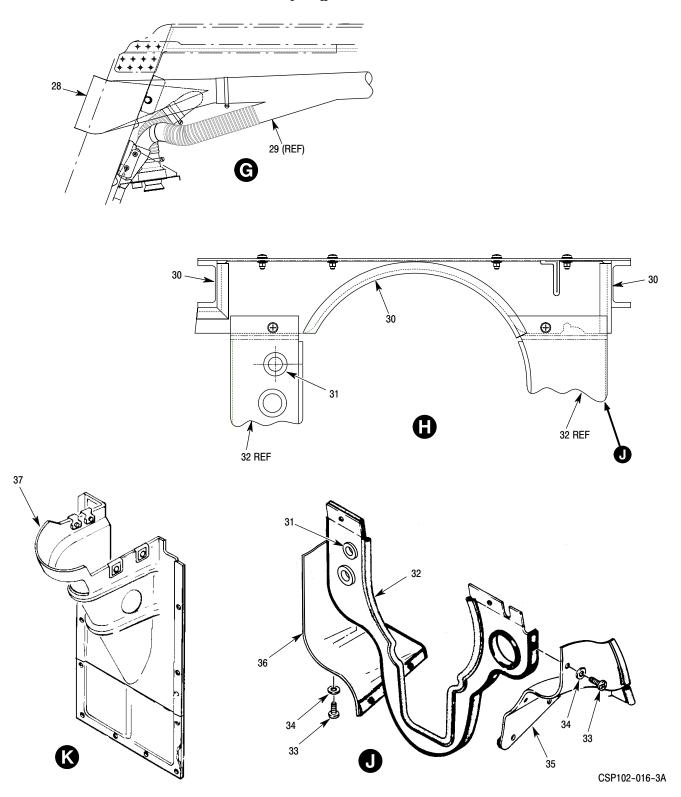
Modification Kit Installation Airframe Structure Upgrade Transmission (Sheet 3 of 3)
